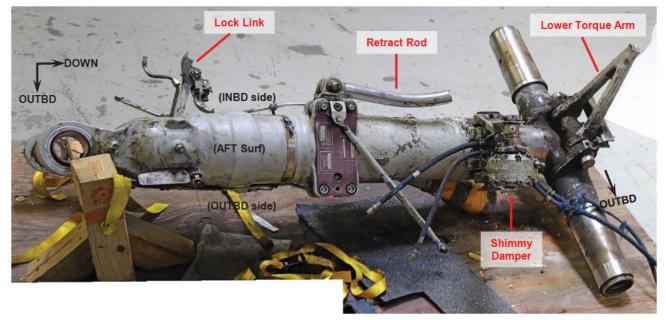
Overall of MLG assembly in as-received condition [cylinder and axle rotated 45° relative to each other]
